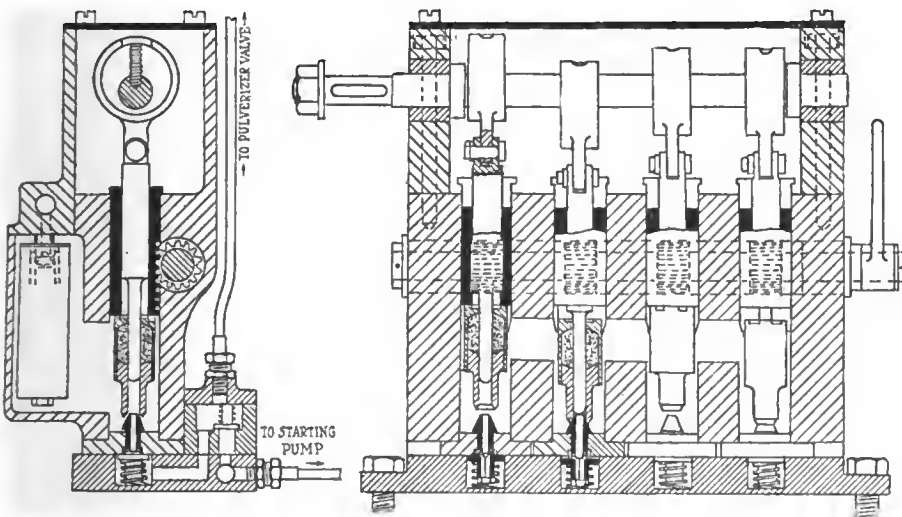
Fuel pumps of Bellem and Bregeras motor
